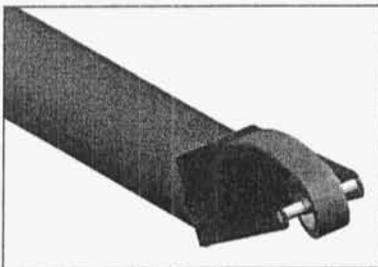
Assembly of a Constant Force Spring and a Bracket to the Cross Bar
